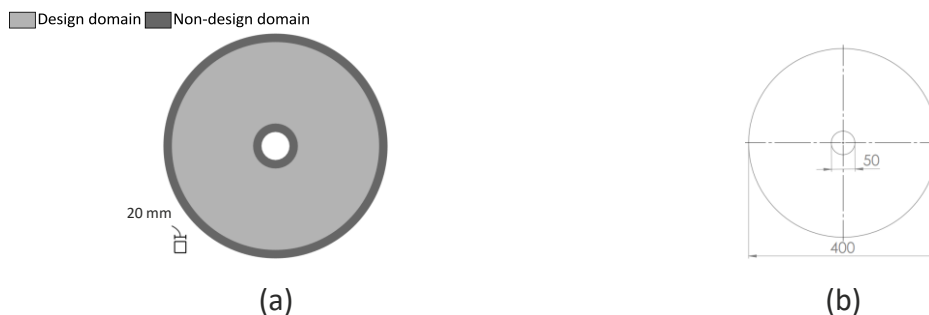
(a) Wheel rim design model; (b) Wheel rim dimensions (mm)
